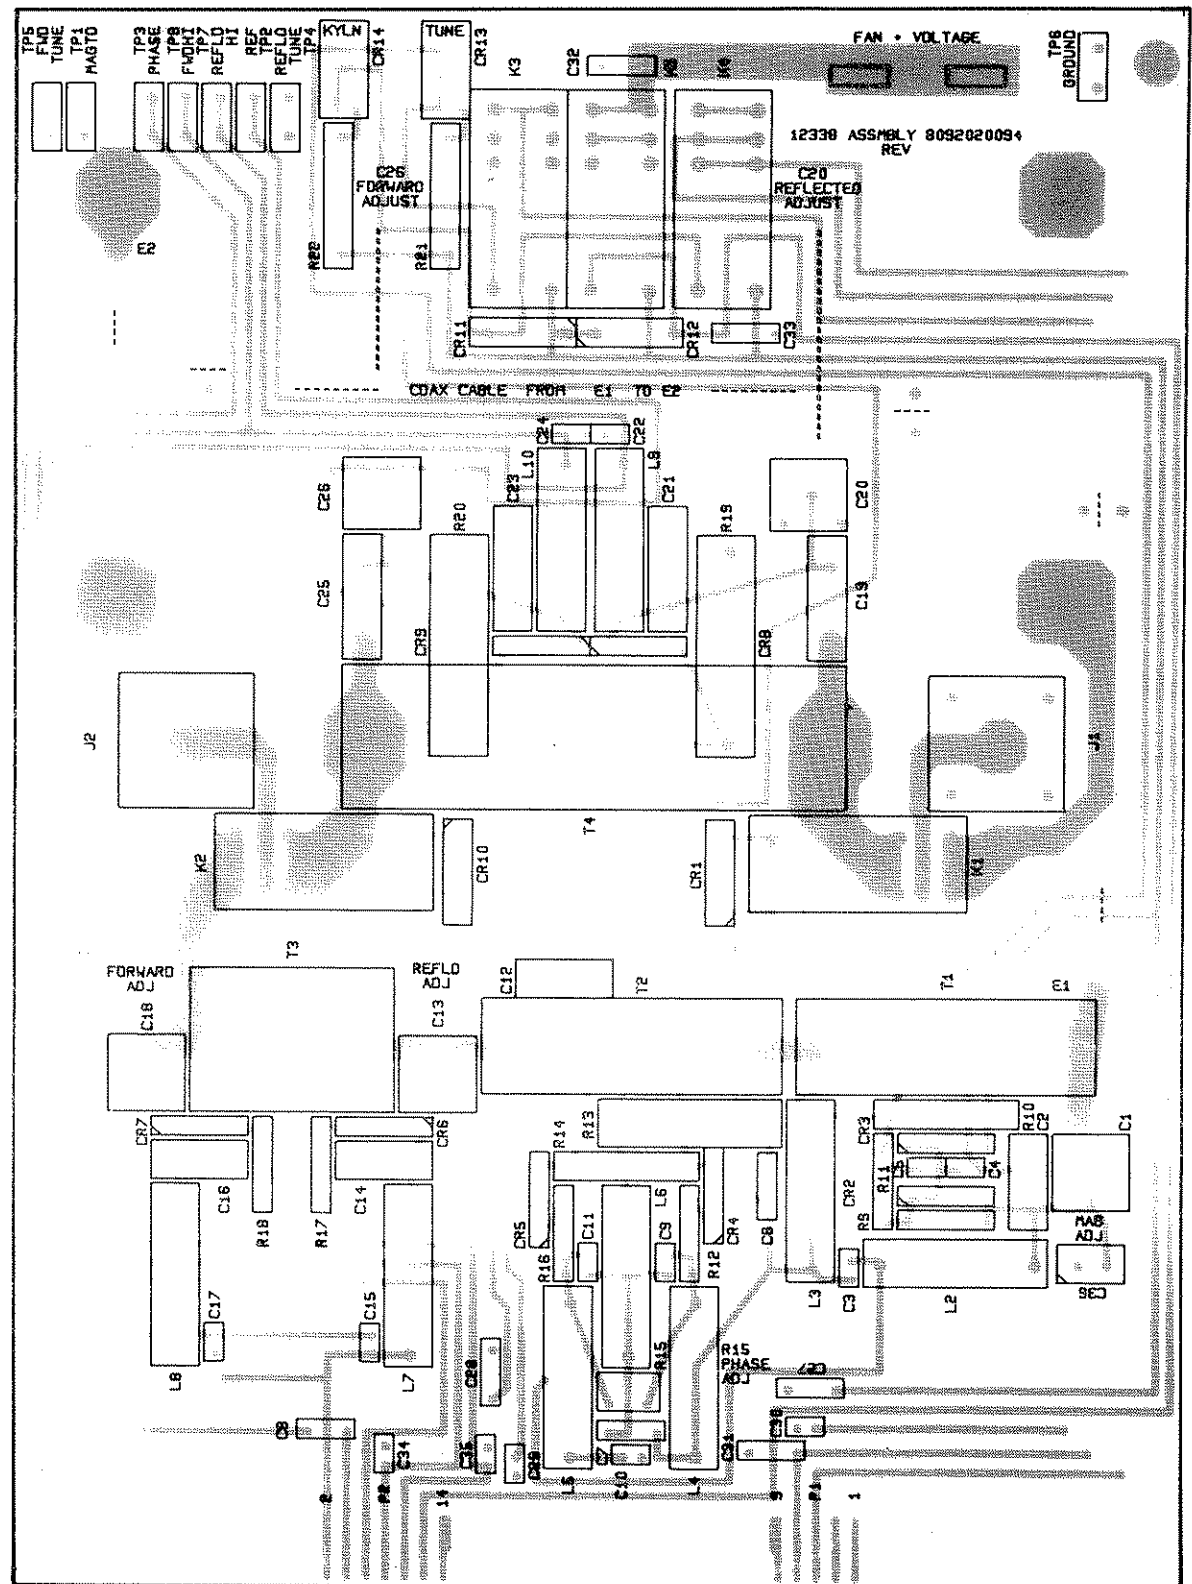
DETECTOR/RELAY PAD ASSEMBLY A3
